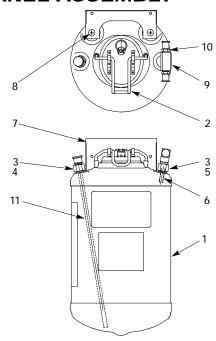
AIR TANK RESEVOIR ASSEMBLY
